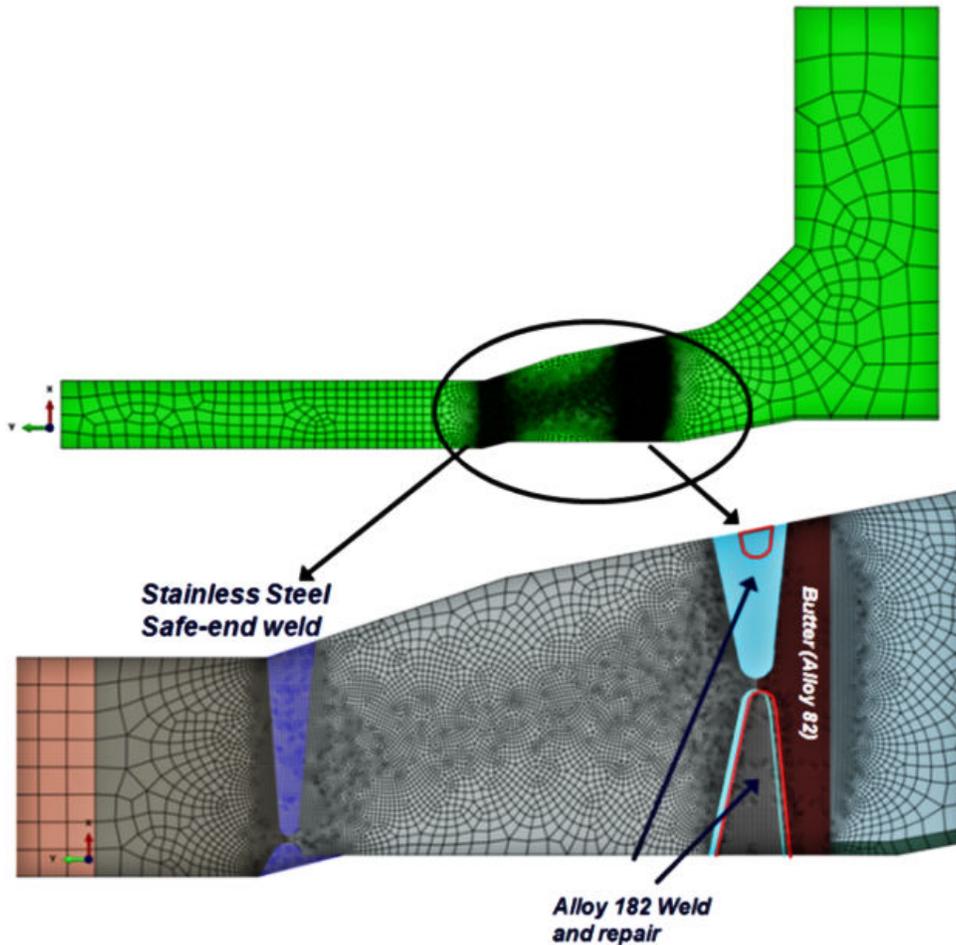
North Anna nozzle illustrating the double vee groove geometry and repair welds
